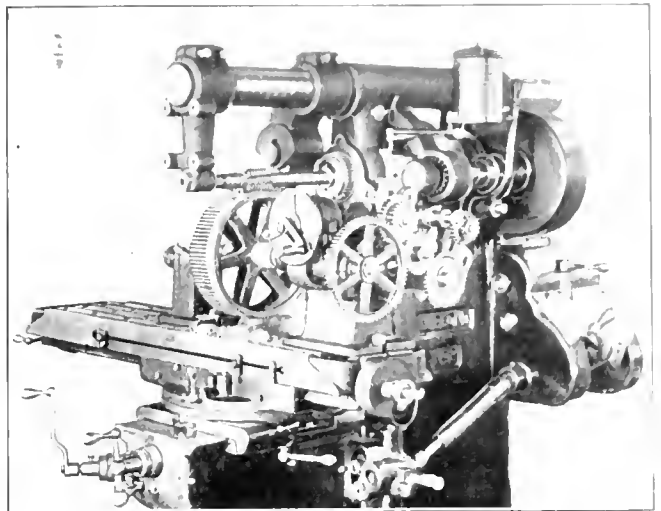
Hobbing a Spur Gear with the Hobbing Attachment on a Universal Milling Machine.
